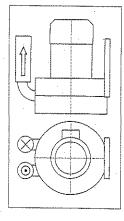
2BH1840-7J... (two-impeller pump-motor unit with double-flow design)
